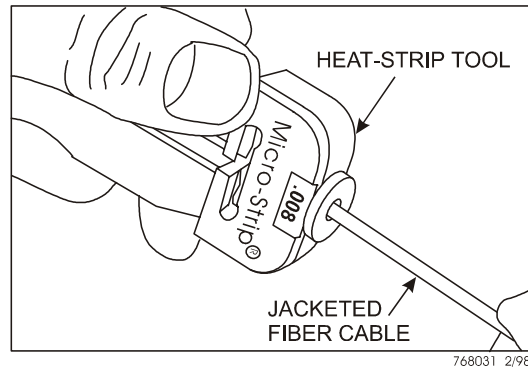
Heat-Strip Tool - Jacketed Fiber Cable
